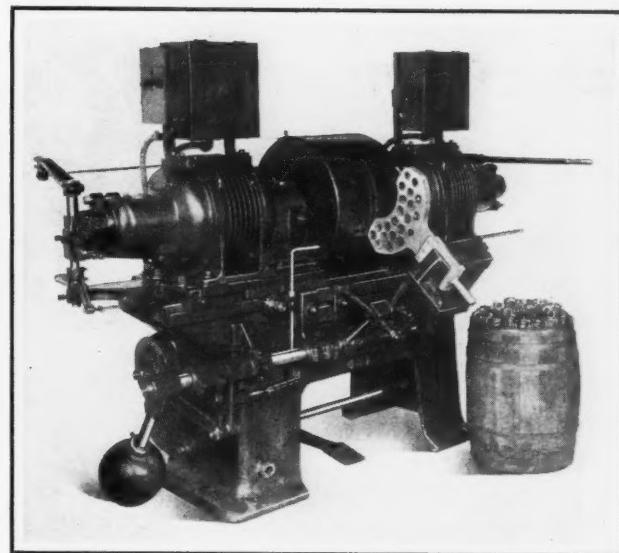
Grinding Both Ends of Twenty Coil Springs simultaneously
